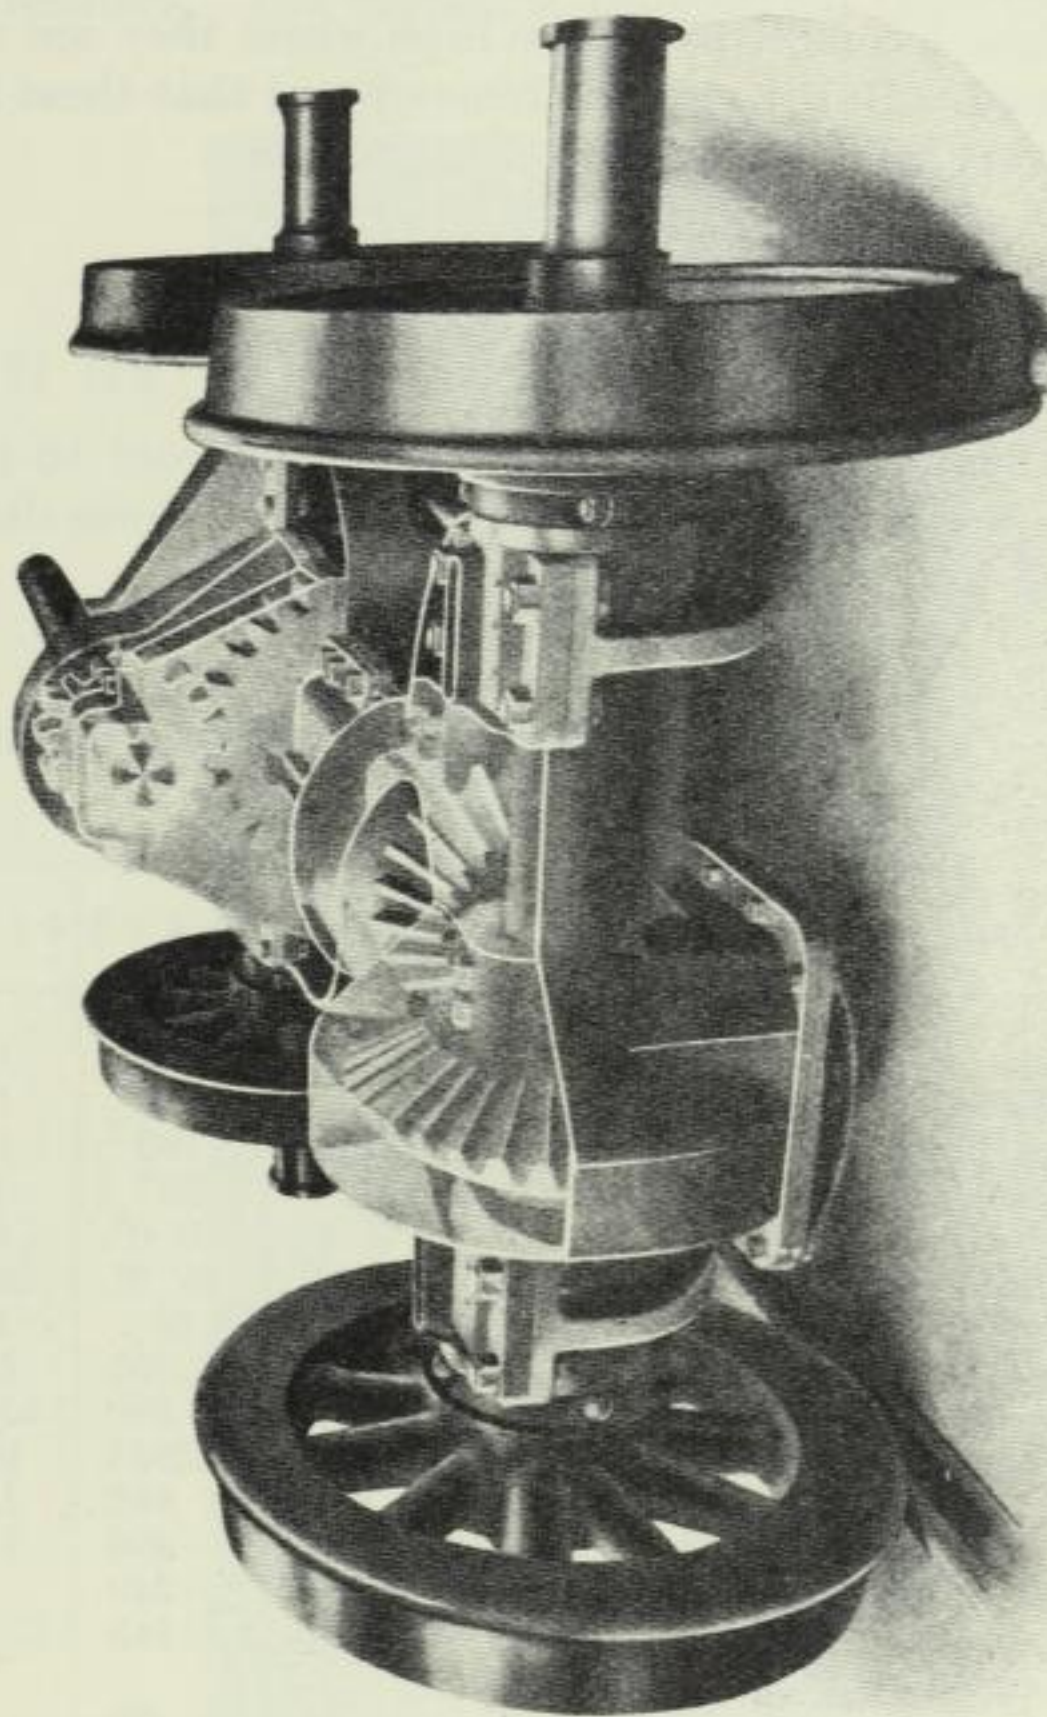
Truck with Gear and Gear Housing in Place, Baldwin Geared Locomotive.
